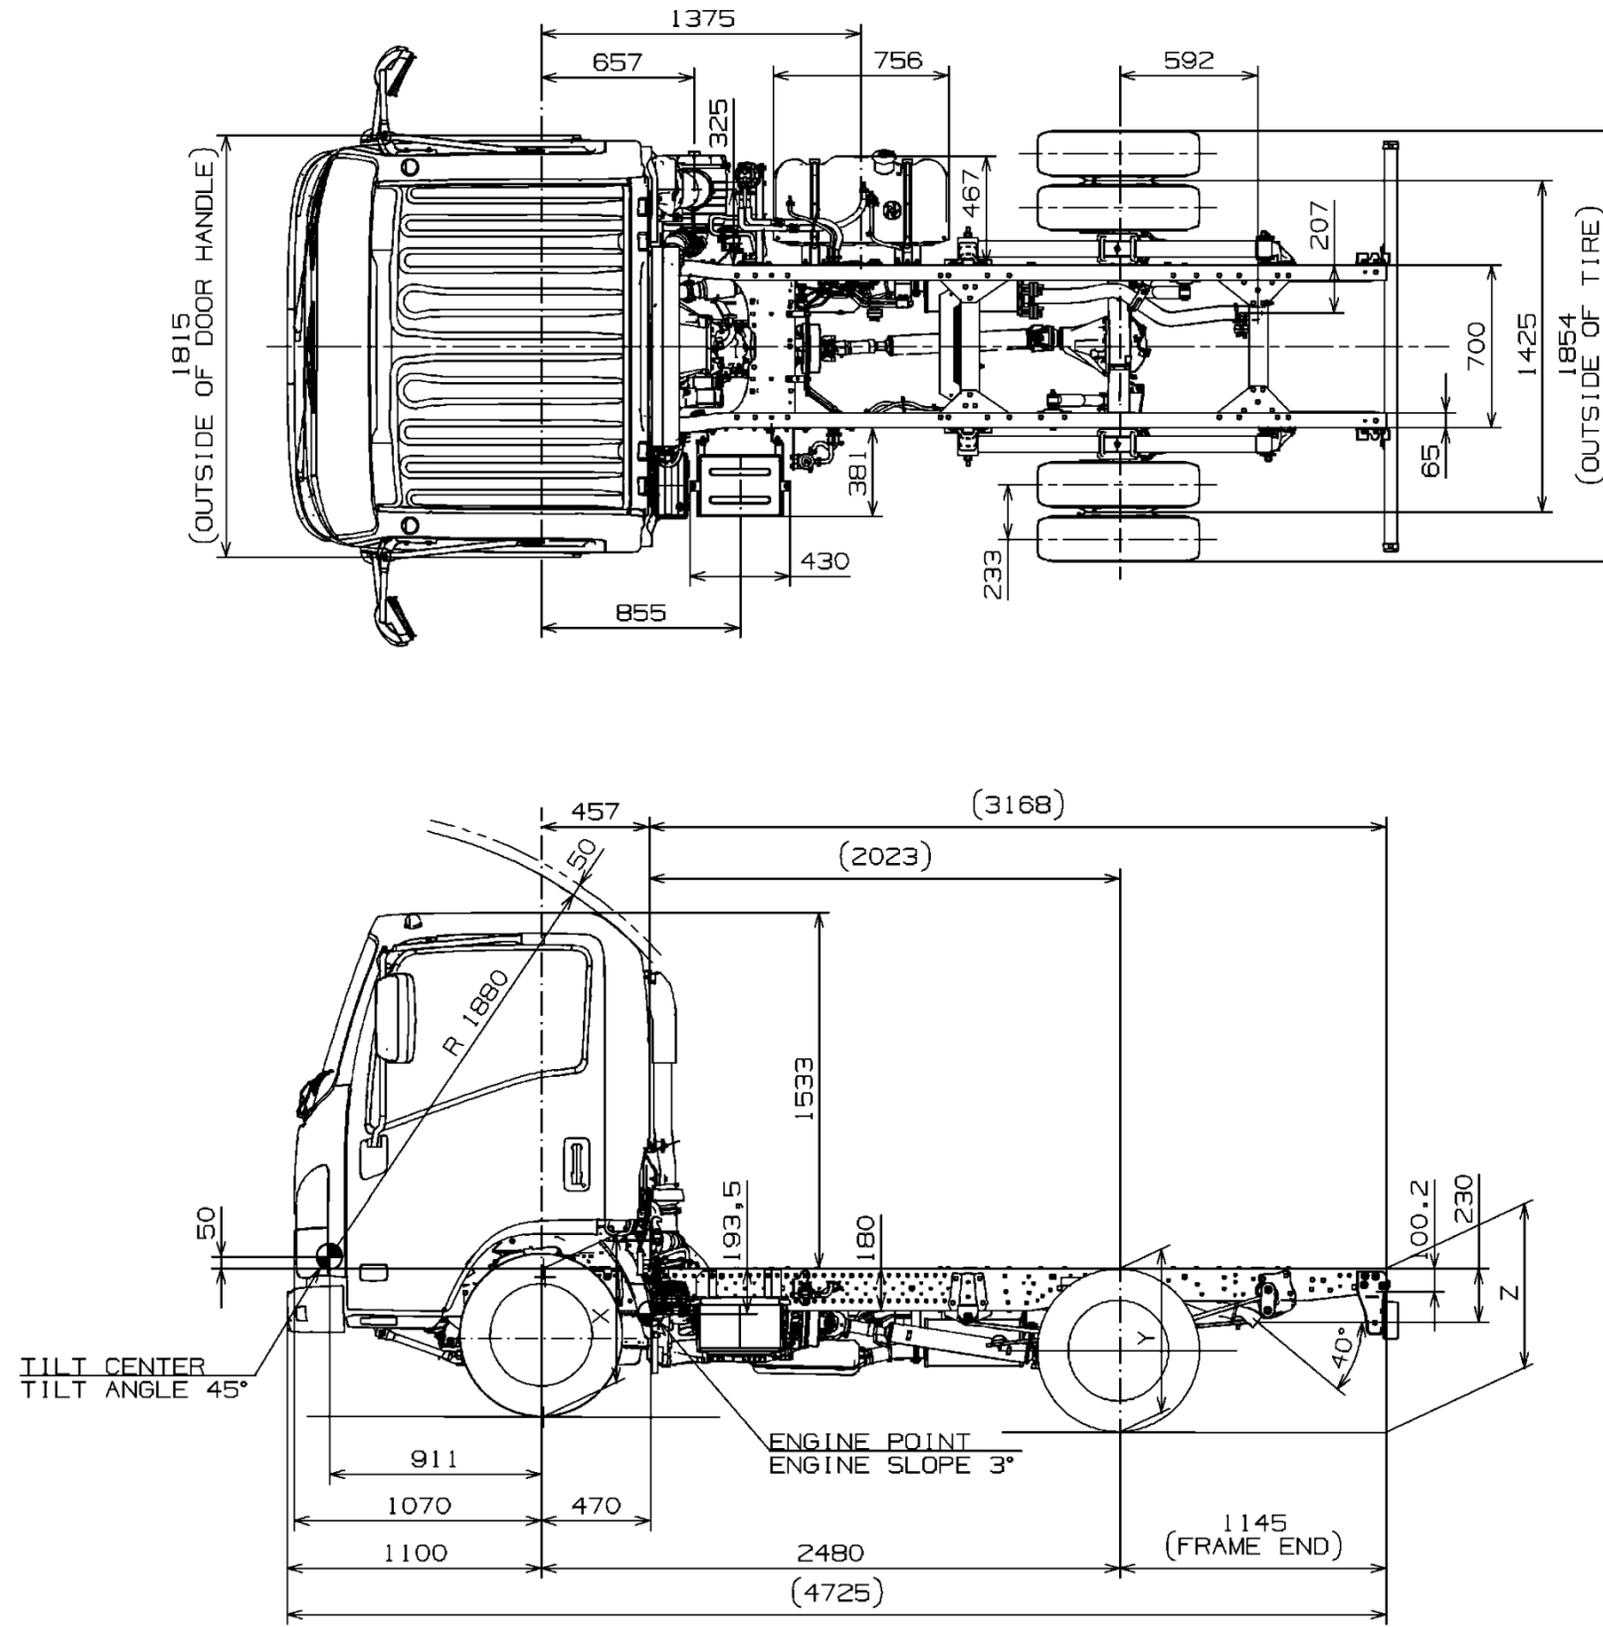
Cab Chassis Drawing NLR85AL-HD5AYEN
